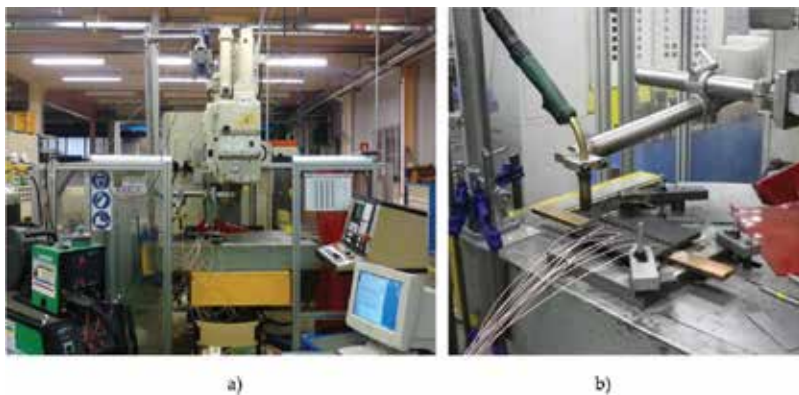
a) Set-up to automatically perform the welding process and b) Detail of the welding configuration.
